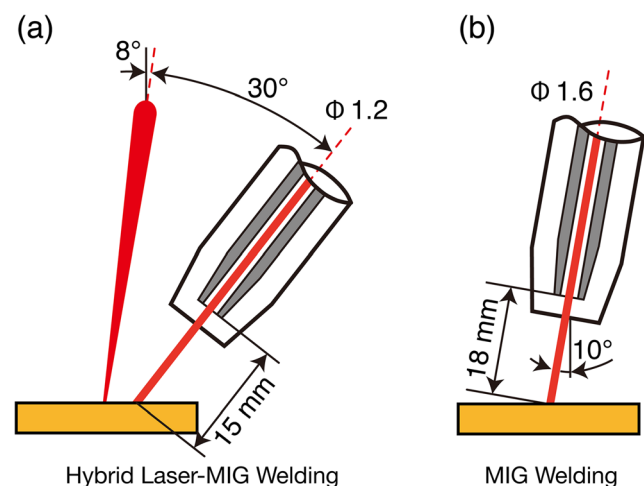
Welding parameters remaining unchanged during a hybrid laser-MIG welding and b MIG welding
